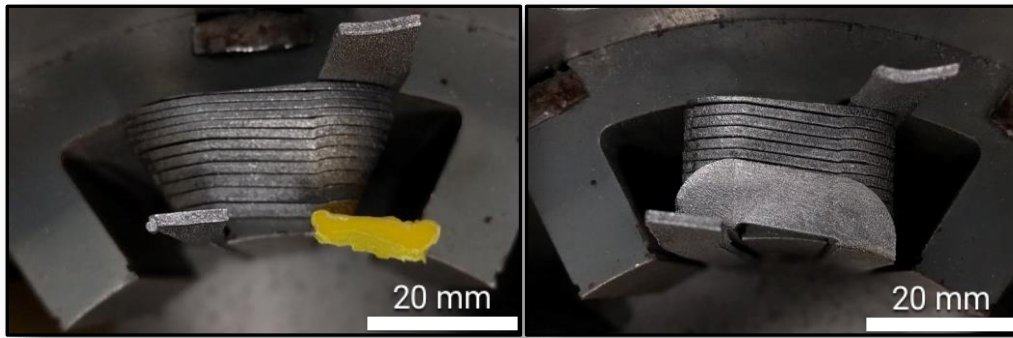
3D printed aluminium windings assembled into an SRM with a 'wedge' design (left) and a 'block' design (right).
